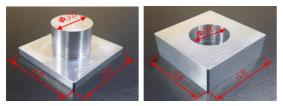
shows a specimen for the machining experiment; 36 pieces each were prepared with a size of $58 \times 58 \times 30$ [mm] with a shape of a ϕ 30 shaft and a ϕ 30 hole within a control tolerance of 0.01 mm.
